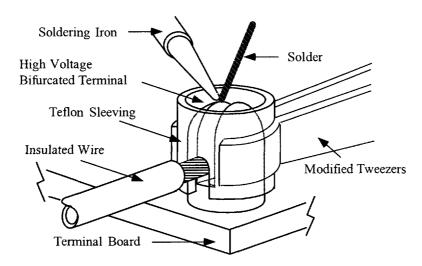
High Voltage, Bifurcated Terminal Assembly.
